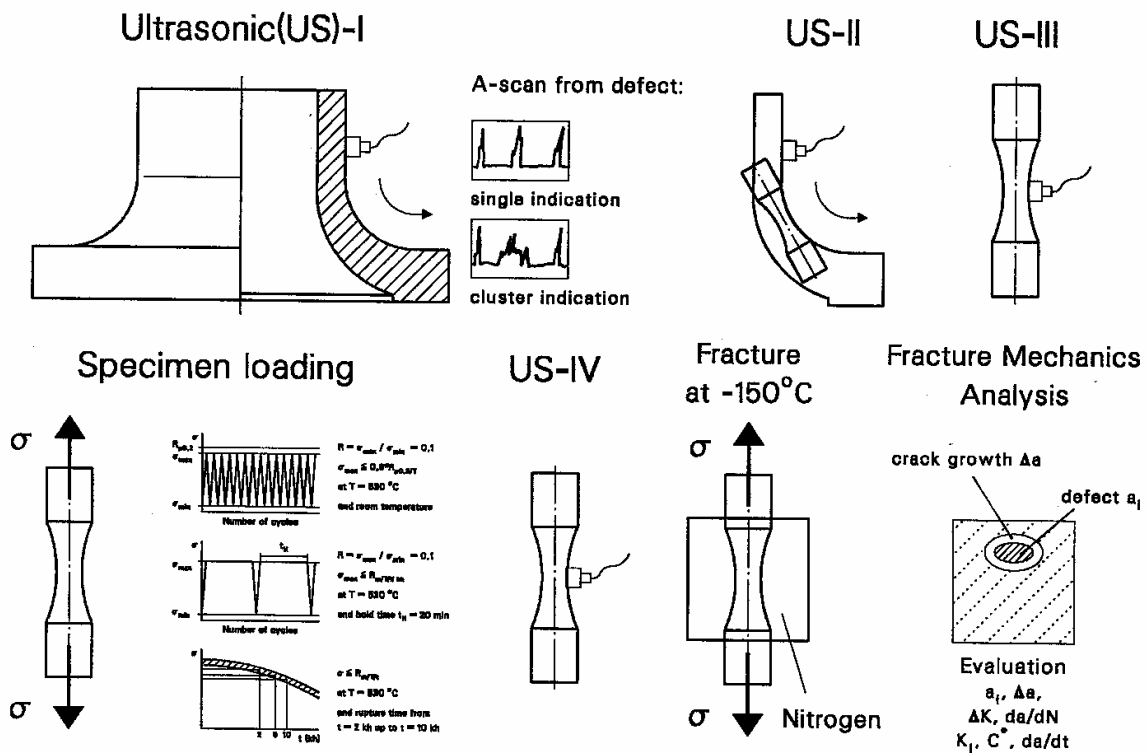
Inspection, removal, loading and evaluation of specimens from flaw-bearing castings.
